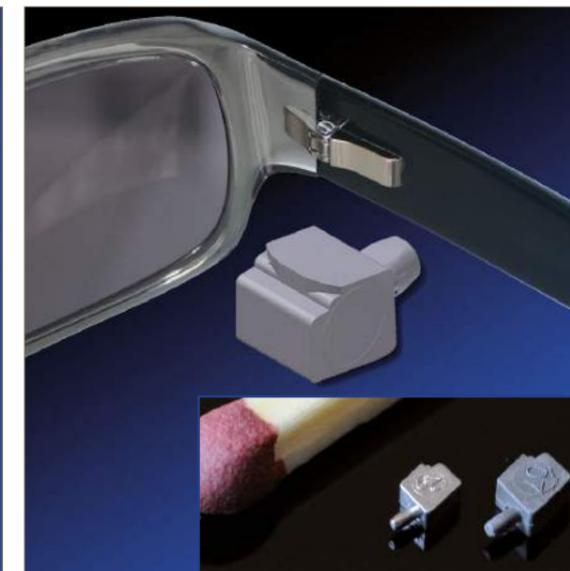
OBE won a 2010 EPMA Award for this extremely small MIM 316L part for a spectacle frame locking device. The part weighs 0.028g and more than 4 million parts are produced each year. The part is manufactured in a 32 cavity mould
